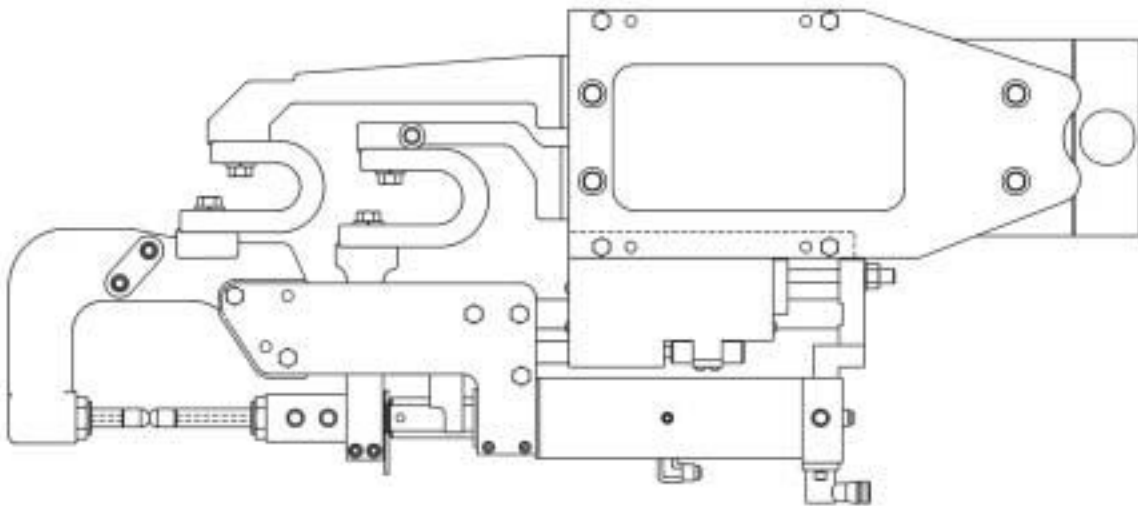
Fixture Style, C-Type Gun w/Transformer
